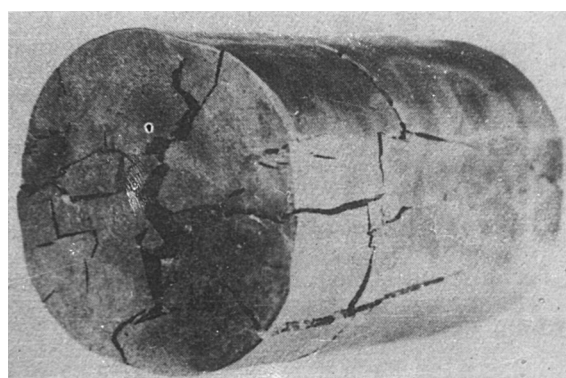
Macroscopical fracture of room temperature forged ingot.
